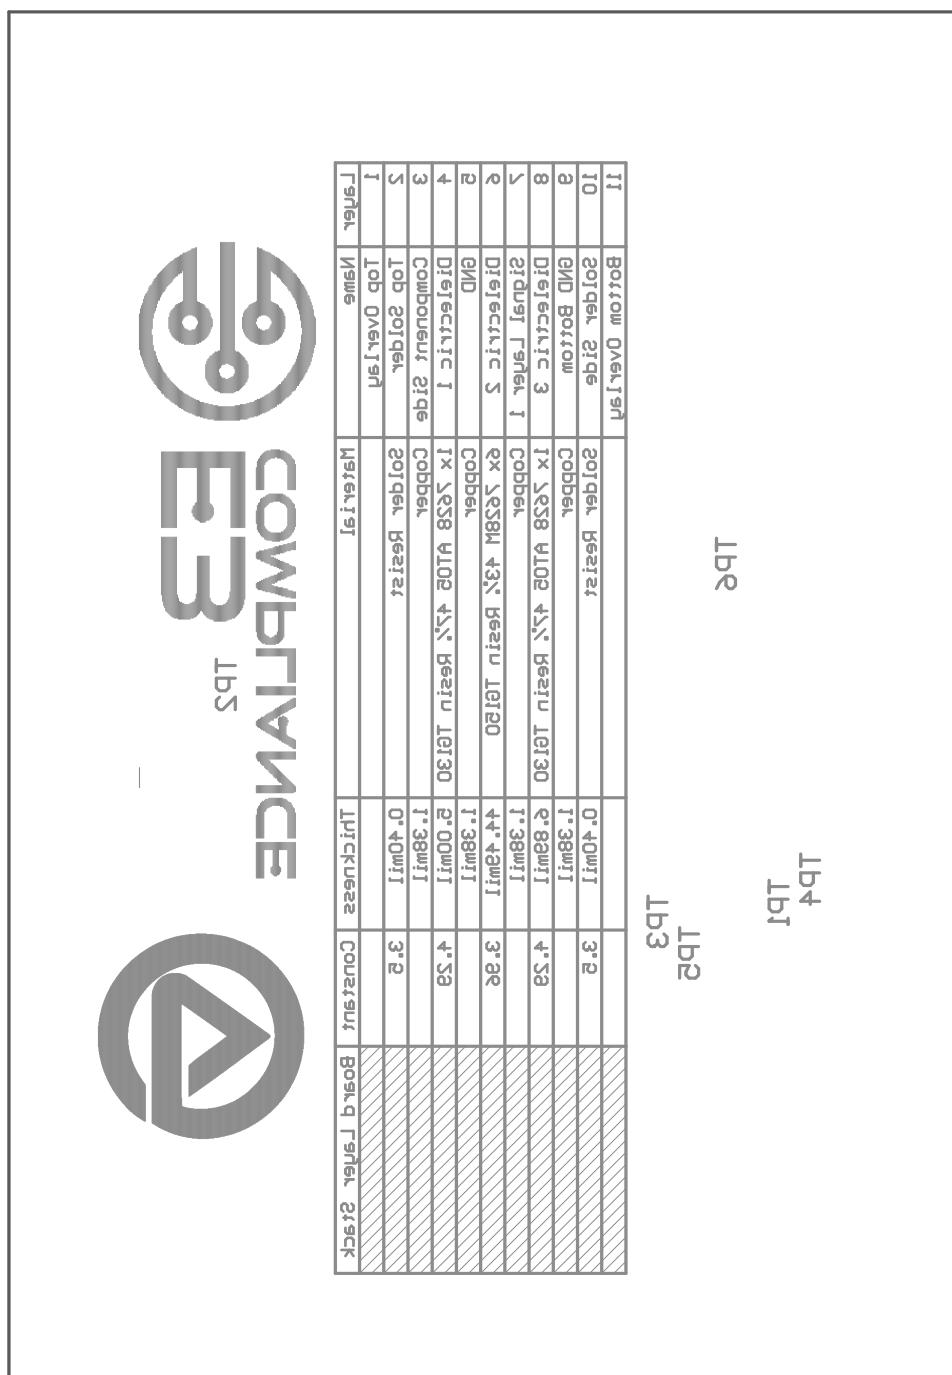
Switched Mode Power Supply v2 assembly bottom.
